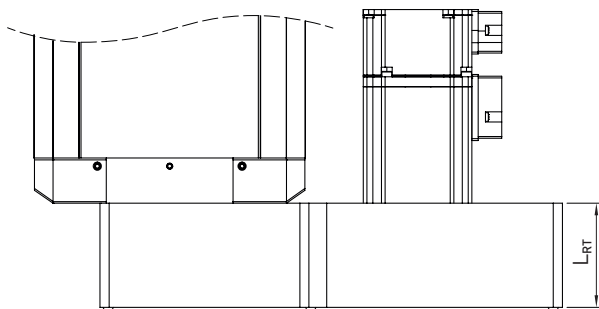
Motor connection of linear tables HT-S with belt drive
